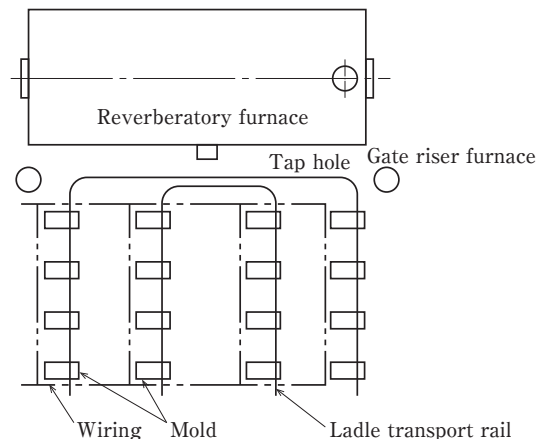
Layout of reverberatory furnace and molds¹⁾.
